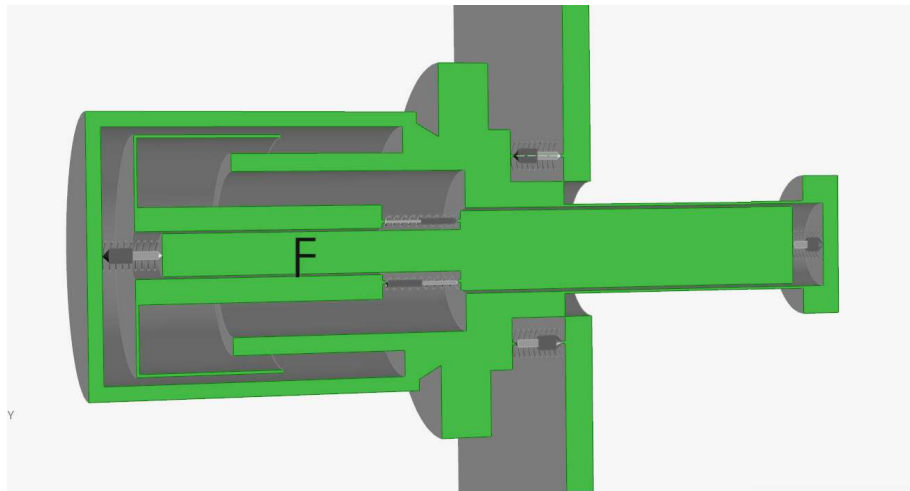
Cross-section layout of cryocooler mounted to GMACS' wall used in MBD
